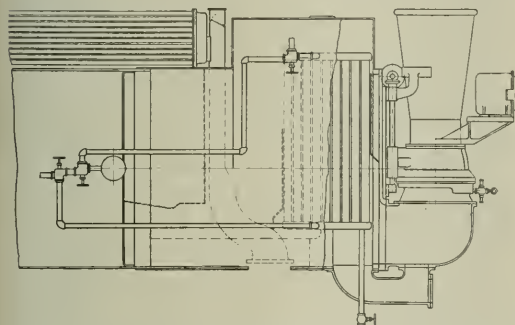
Modified Front End, Equipped with Induced Draft Fan and Feed-Water Heater
